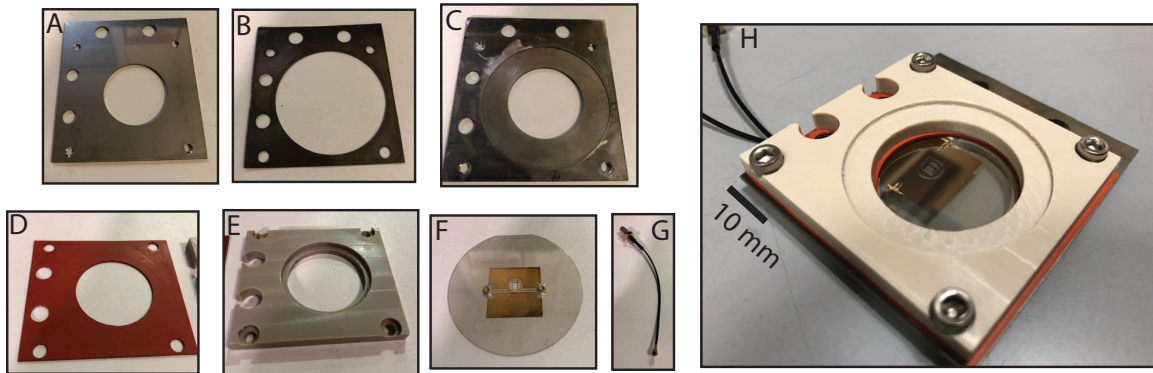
Major components of the final design. (A) Waterjet cut nonmagnetic stainless steel baseplate. (B) Waterjet cut titanium shim (300 μm thick) (C) The components from (A) and (B) laser welded to one another to allow for reliable placement of the SiC wafer. (D) Silicone rubber sheet laser cut to allow for a water-tight connection. (E) Biocompatible, machined PEEK plate to apply the mechanical pressure and hold the fluid for biological measurements. (F) SiC wafer with fabricated gold structure for MW delivery. (G) U.FL connector. (H) Finalized design assembled, stainless steel or brass bolts could be used for clamping to components to the threaded holes in the baseplate in (A).
